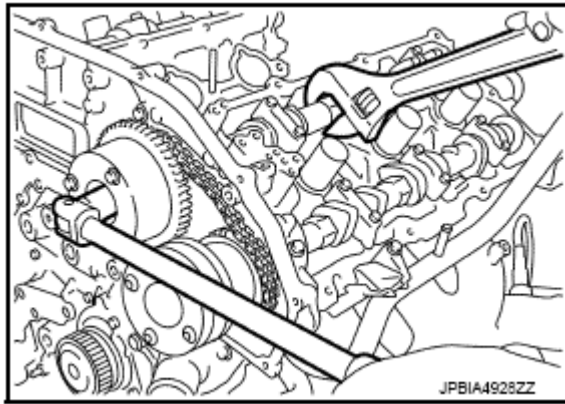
Removing Camshaft Sprocket Mounting Bolts Using Wrench
